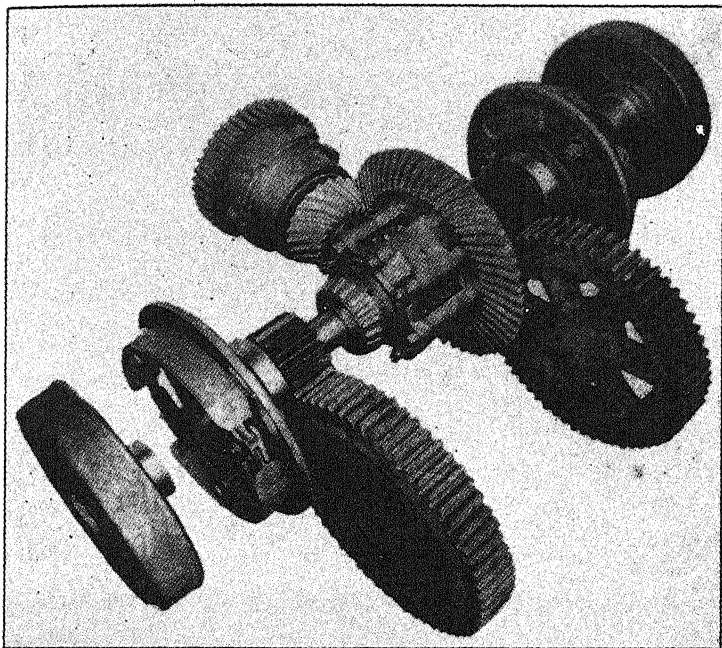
A. Final drive gears, brakes, differential, and drive pinion of Minneapolis-Moline tractor.
